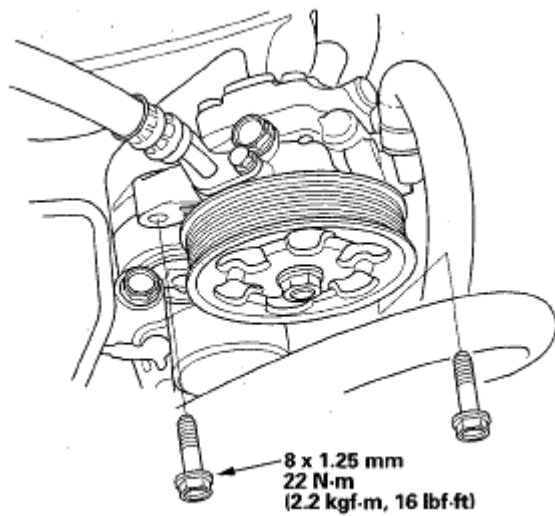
Identifying Power Steering (P/S) Pump Bolt (With Torque Specifications)
